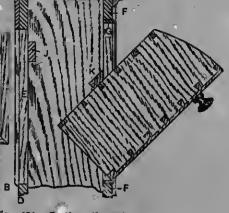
Section through Upper Part of Music Cabinet showing Drawer Extended.
